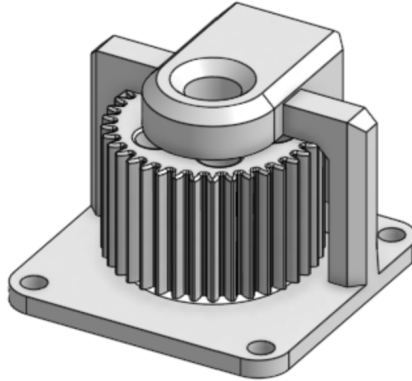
Carousel drive gear seated in its cover between the top and bottom plates.
